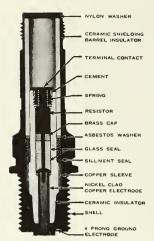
A Simplified Cutaway Drawing of a Spark Plug
